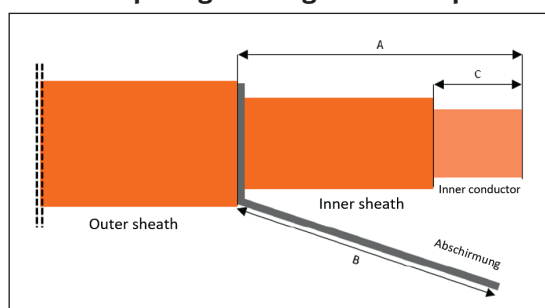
Dimensions for the preparation of single-core HV power cables
